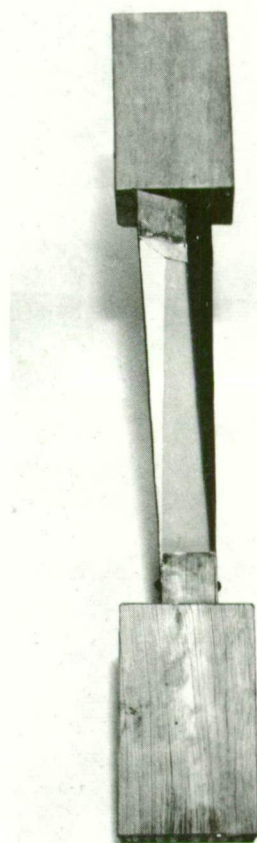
The mould, made from twisted strips, used in the manufacture of half deformed elements
